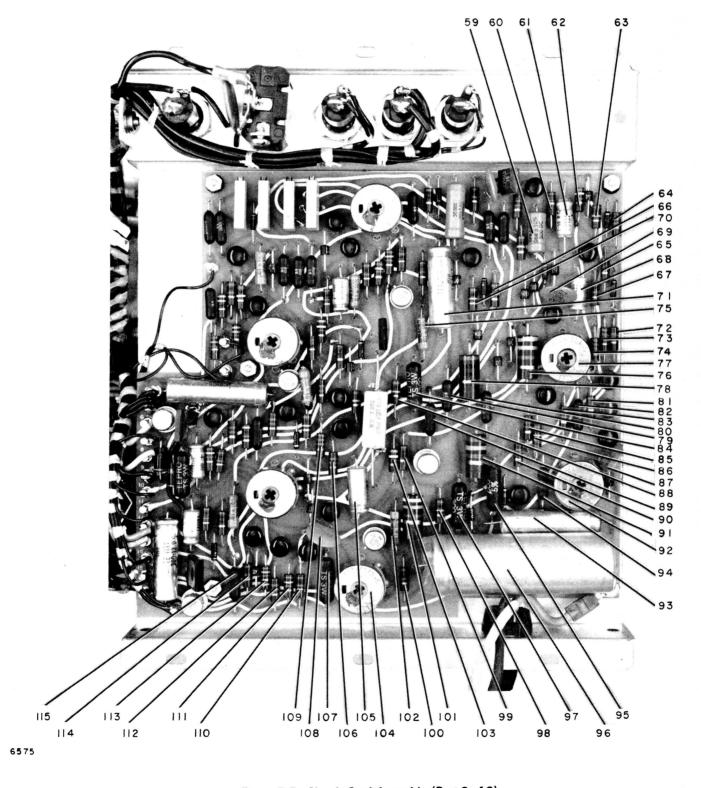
Circuit Card Assembly (Part 2 of 3)
